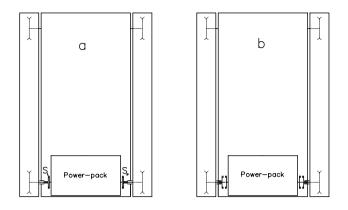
S_L and S_P are dog clutches for engagement (a) and disengagement of power-pack with sprocket (b)
